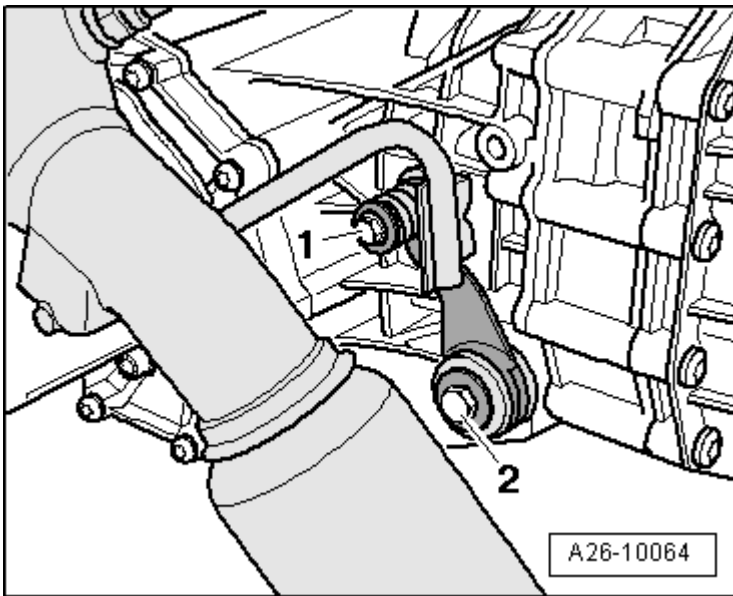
Removing Bolt At Left Bracket For Front Exhaust Pipe
